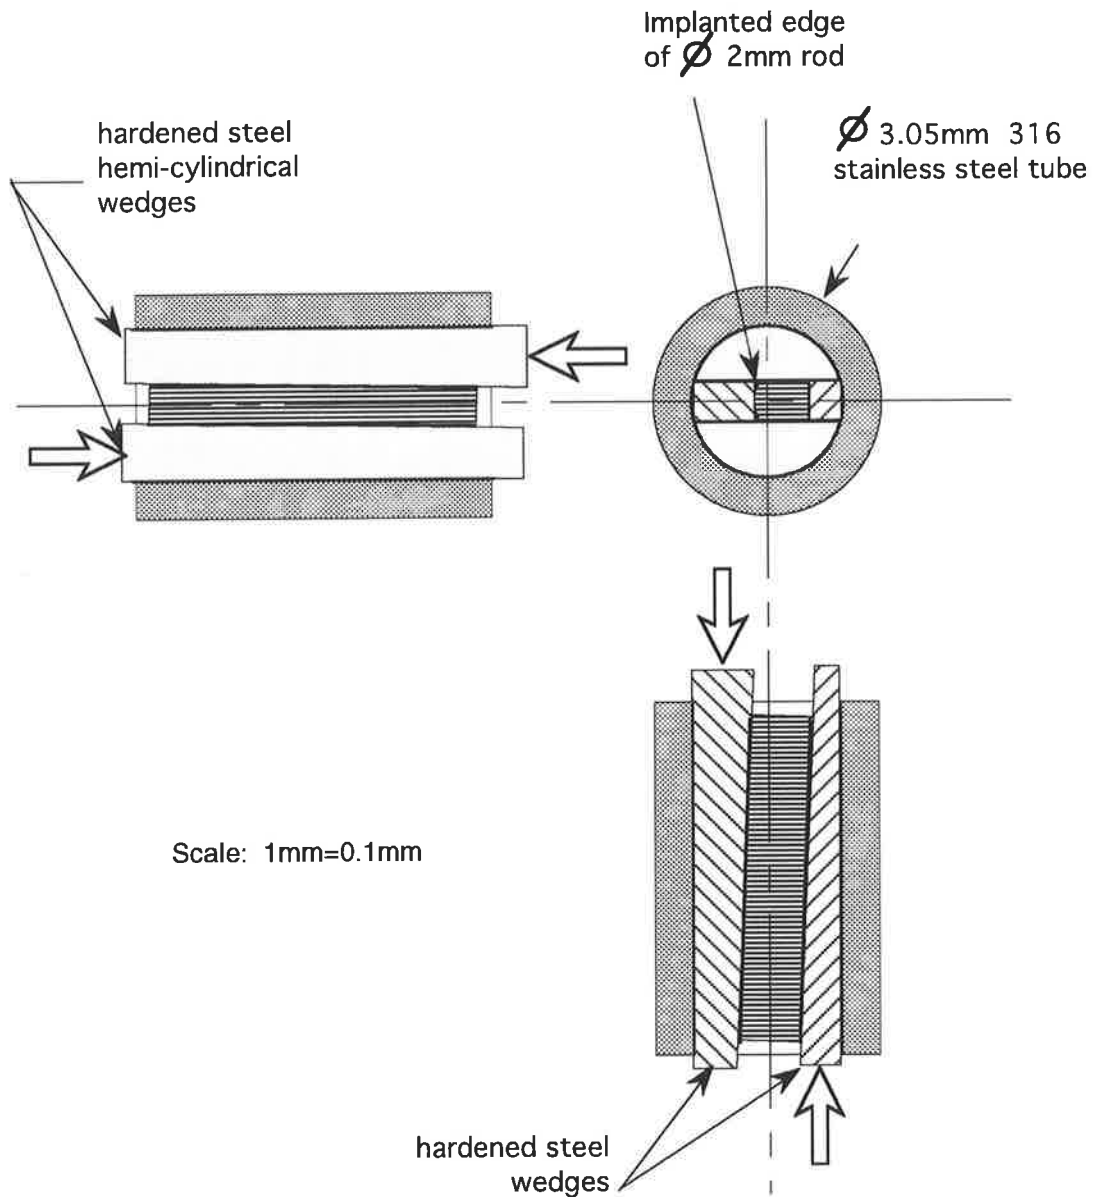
A modified technique to prepare a cross-sectional TEM specimen of a surface hardened rod (from PIII treatment) for dimple grinding and ion milling.
